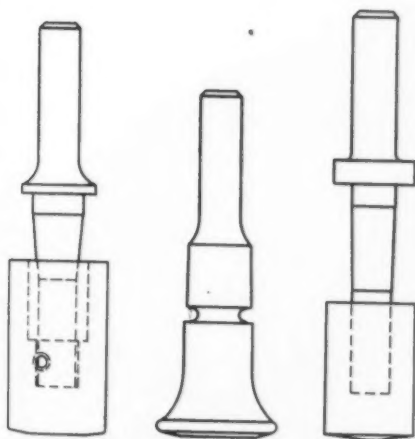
Typical rivet driving tools used in pneumatic squeezers for setting flush head rivets.
